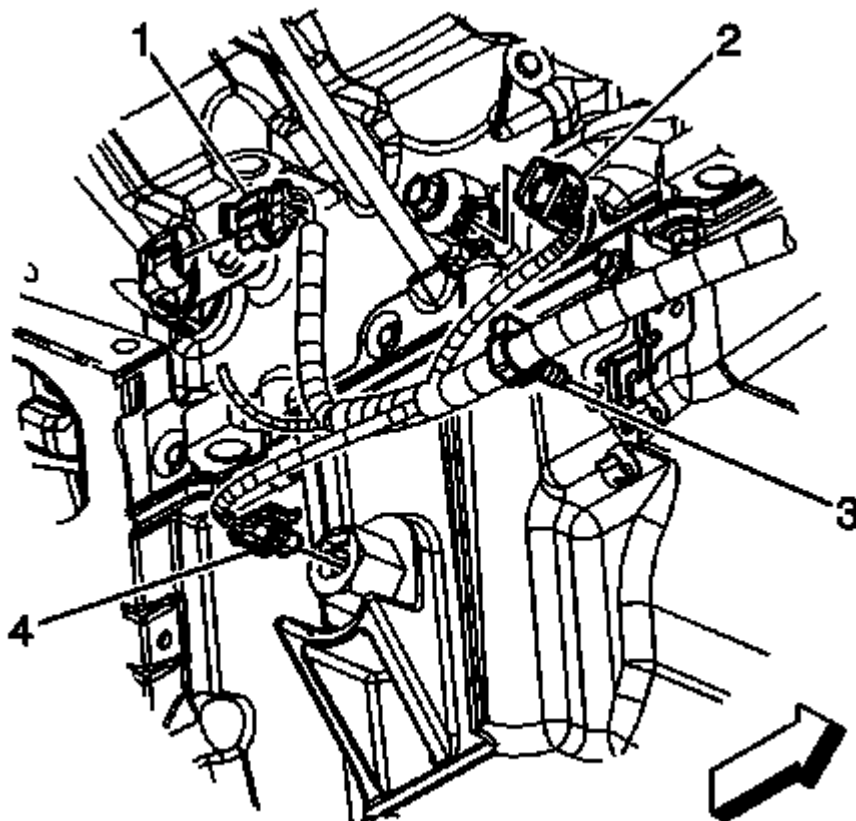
View Of Electrical Connector, Cable Channel Bolt & Pin
